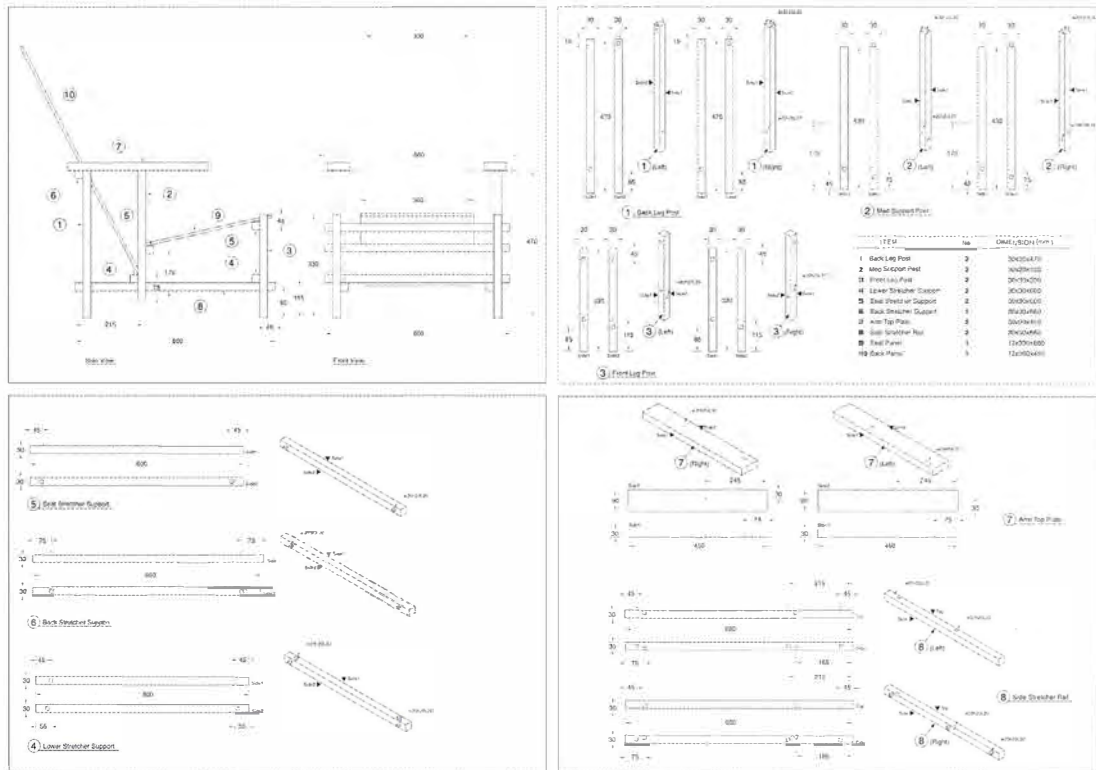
Drawing of The Rietveld Chair with Interlocking Joint
